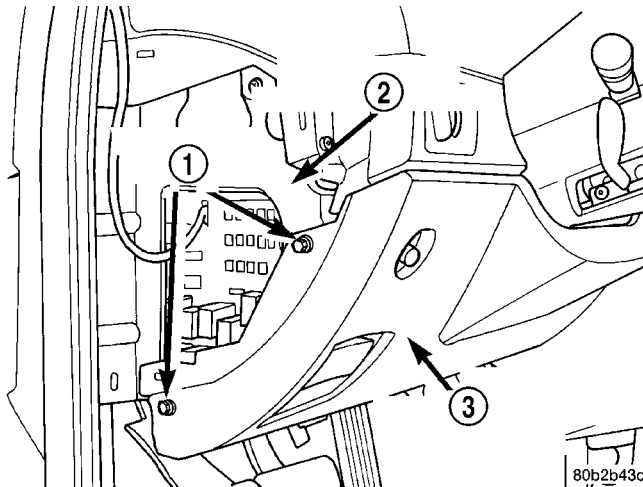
Lower Instrument Panel Cover Mounting Screws
